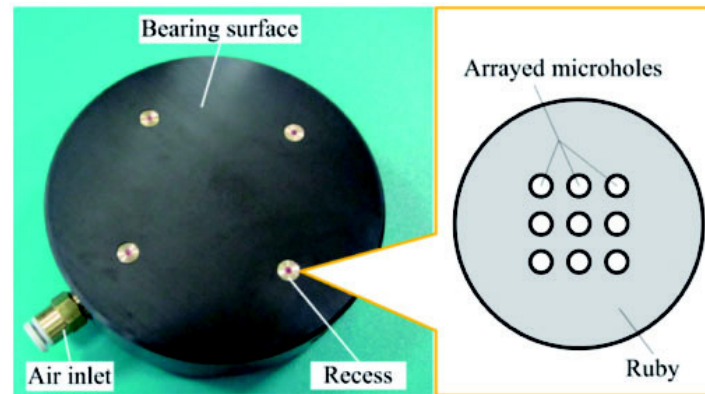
Photo of a recessed aerostatic bearing with AMR [64].
